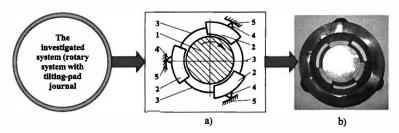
The investigated system: a - tilting-pad journal bearings, 1 - rotor, 2 - segments, 3 - elastic coupling, 4 - adaptive thrust, 5 - spindle head; b - photo of bearing
